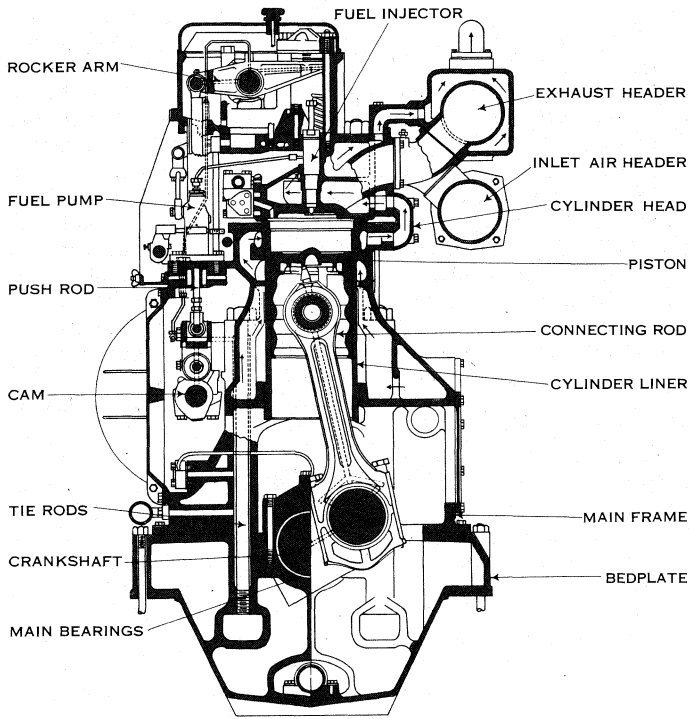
SECTIONAL VIEW OF A MEDIUM-SPEED, FOUR-STROKE-CYCLE DIESEL ENGINE
